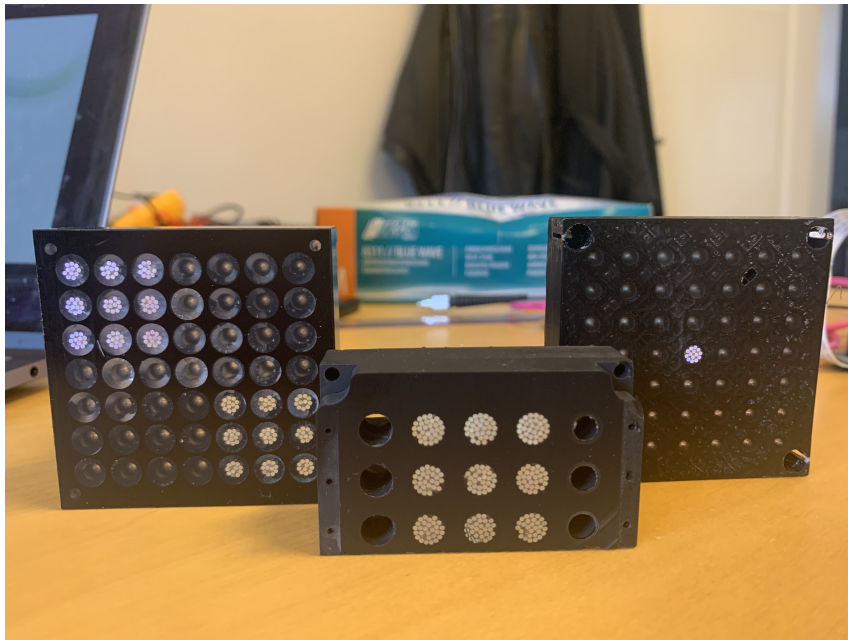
The picture shows the three different materials of collector plates after being glued with optical glue and cut using a diamond blade cut.
